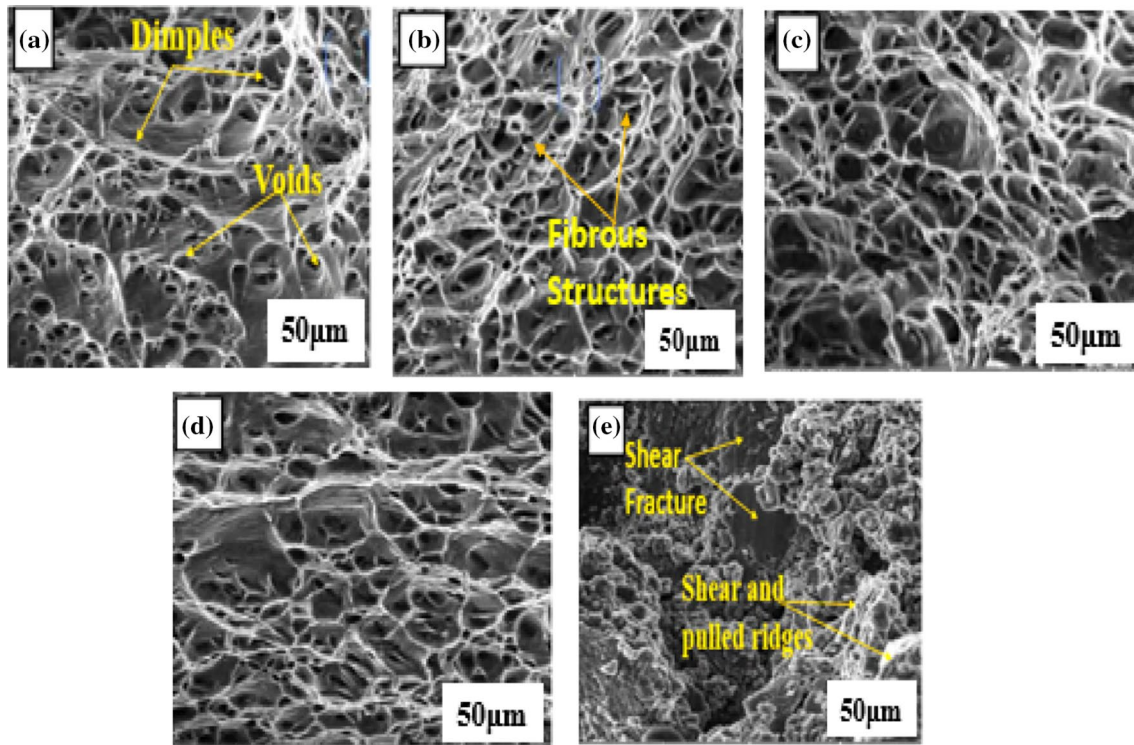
SEM fractographs of the tensile tests fractured surfaces at 1.00k \times for a 1250 rpm at 50 mm/min. b 1550 rpm at 50 mm/min. c 1850 rpm at 50 mm/min. d Base material 6101-T6. e Base material 7075-T651
